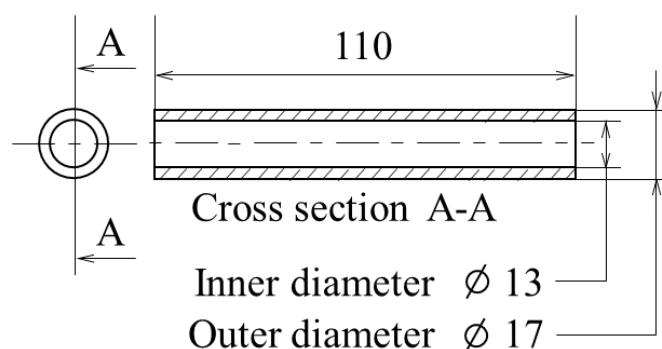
Geometry of specimen for the multi-axial tube expansion test. Dimensions are in mm.
